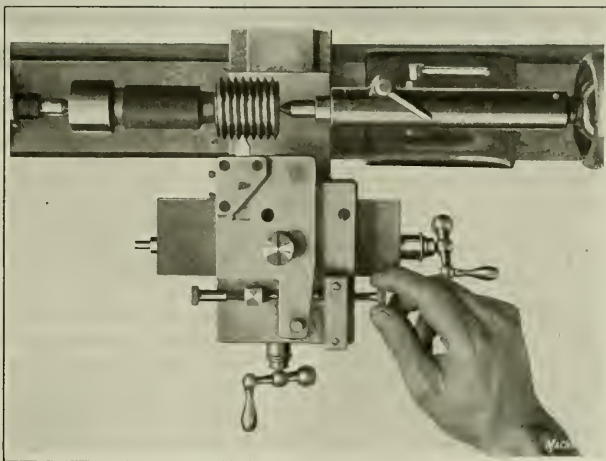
Adjusting Sine Bar to align V-shaped Point with Gage Thread
